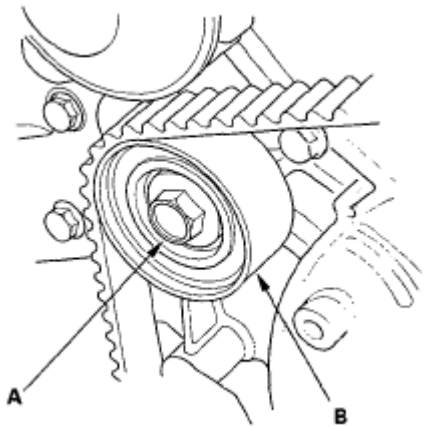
Identifying Idler Pulley Bolt And Idler Pulley
